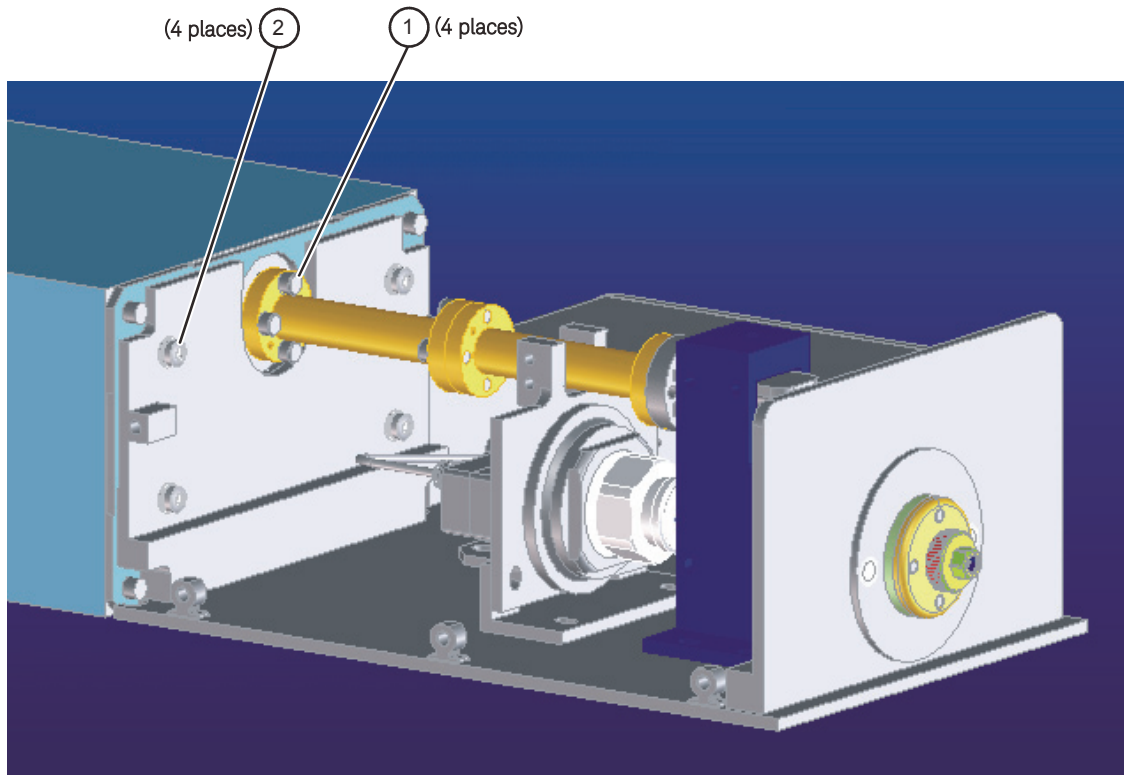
New Design Combiner Assembly and mm-Wave Module: View 2
